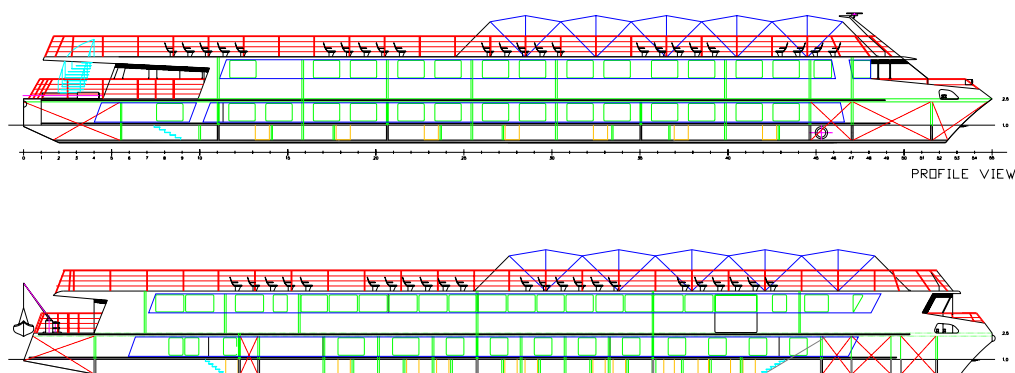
View of the two segments of the designed inland ship: hotel barge – upper drawing and pusher – lower drawing
